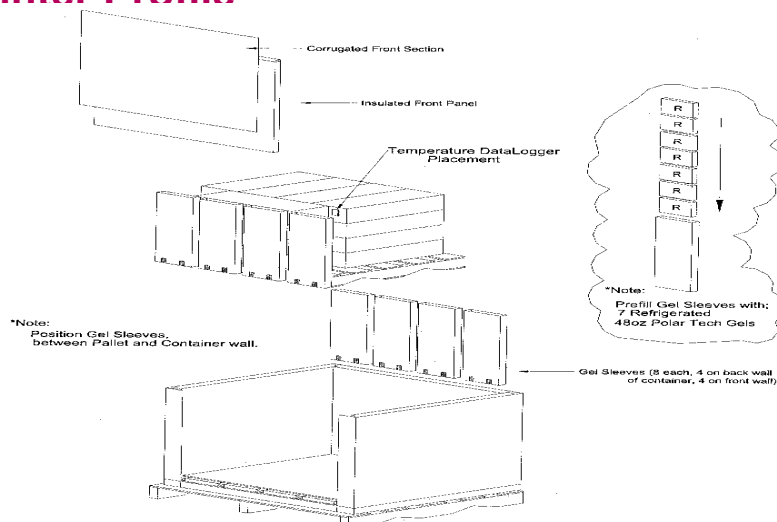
Gel Sleeve, Product Pallet, Front Wall Assembly
